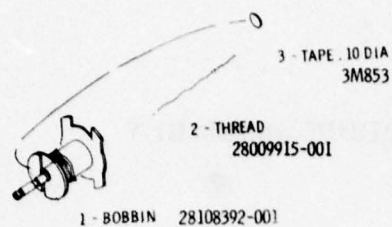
Machine No. 7 - Sensor Bobbin Assembly
